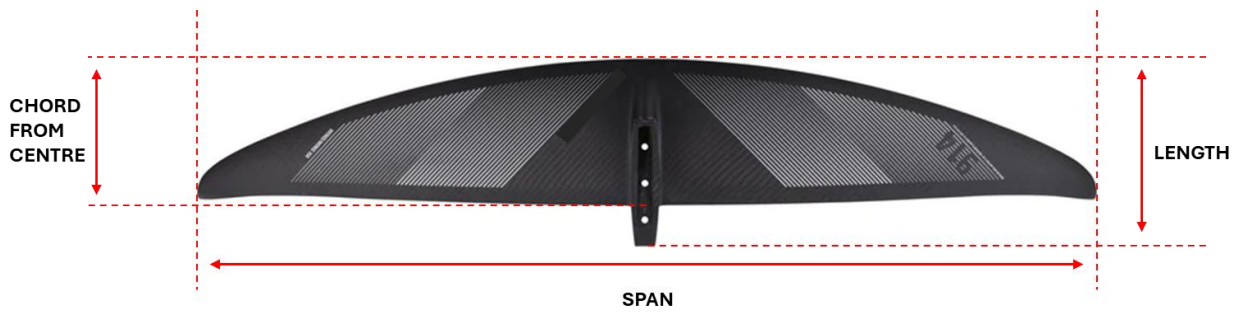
Hydrofoil Front/Rear Wing Main Dimensions
